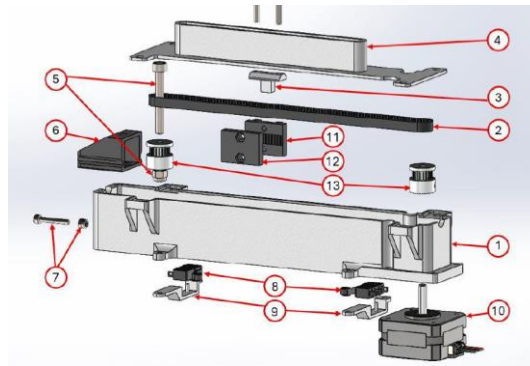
Exploded View of Goalie Lower Assembly (1=Base element, 2=Timing belt, 3=Lower guide block, 4=Inlay, 5=Fastening screw and nut, 6=Slide, 7=Tension screw and nut, 8=Microswitch, 9=Bracket, 10=Stepper motor, 11=Inner terminal block, 12=Outer terminal block, 13=Timing belt pulley)
